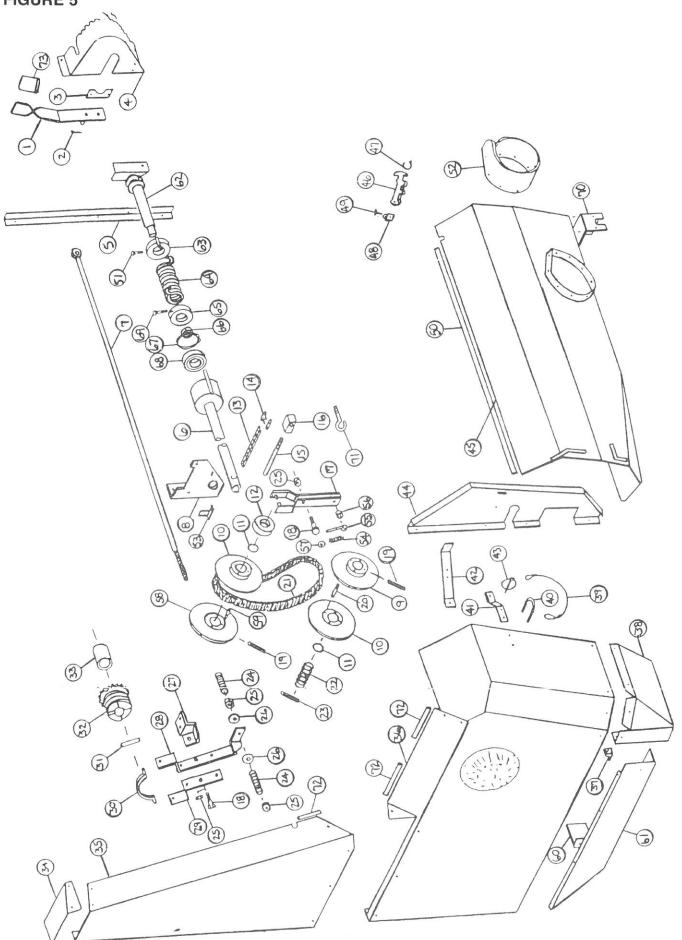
SHIELDS - BEATER CLUTCH - BELT DRIVE
